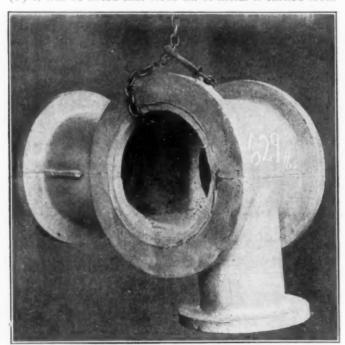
88-10-2 CASTING SHOWING TEST SPECIMEN ATTACHED.
